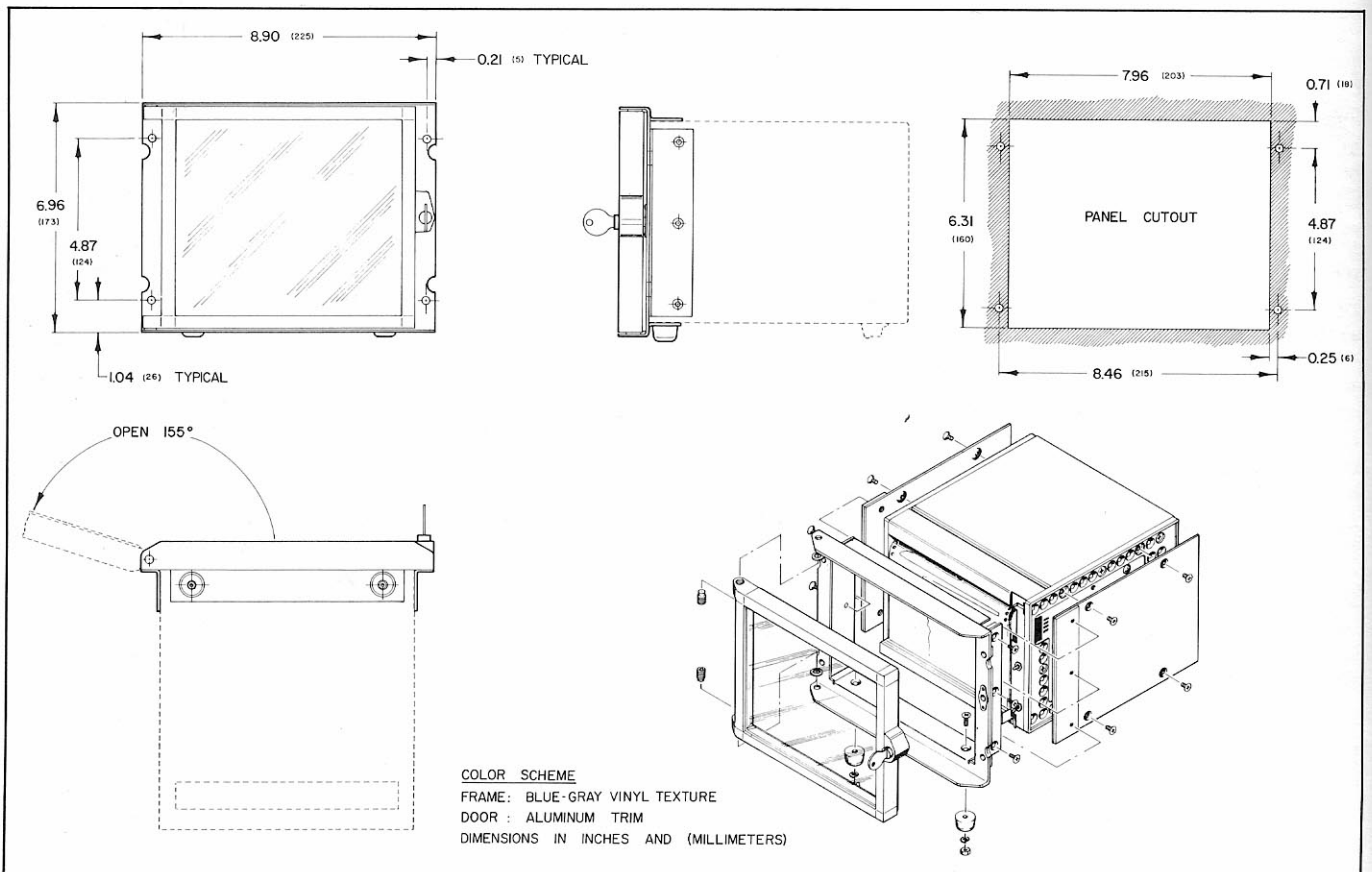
DIMENSION DRAWING OF DOOR ADAPTER (OPTION 14)
